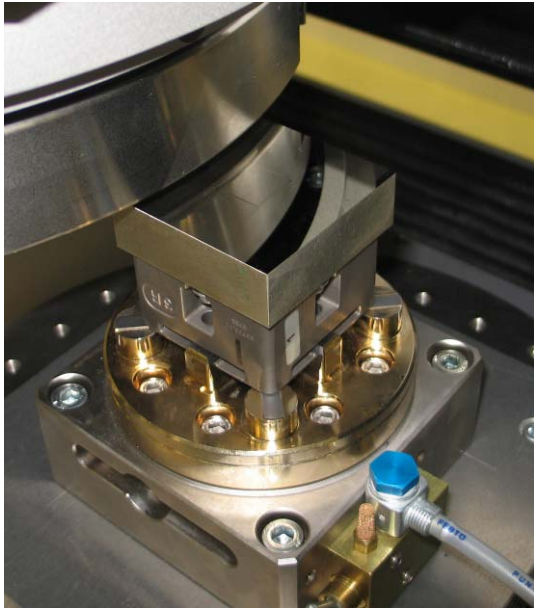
Sample machining using the MACRO-Nano chuck/pallet system
